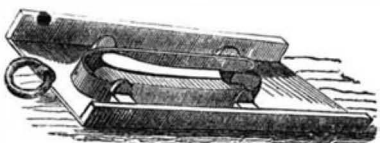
FORM FOR CUTTING THE THUMB PIECES.
